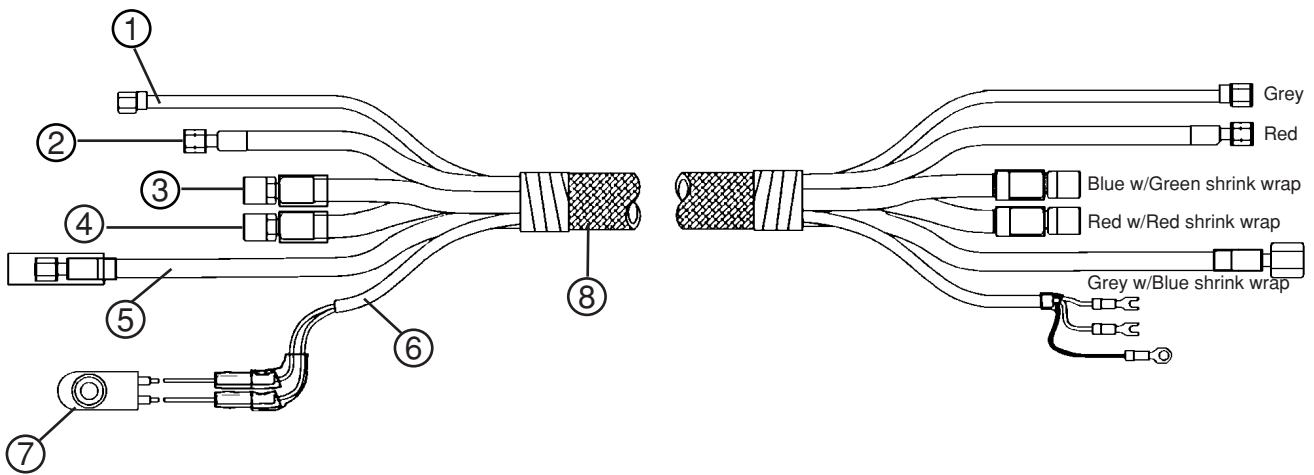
PAC200T/E Trigger Torch Lead Assemblies
